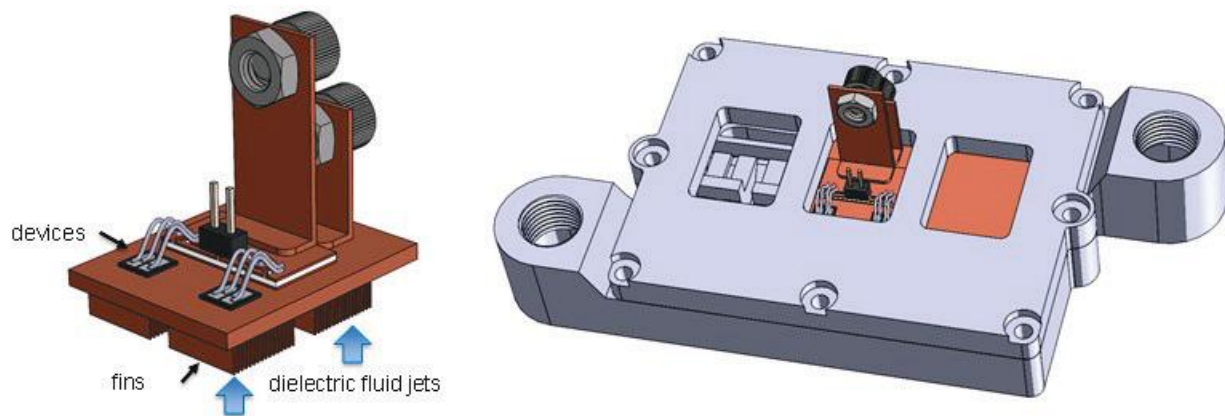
CAD drawings of the SiC module that will be used to measure the junction-to-fluid thermal resistance of the dielectric fluid, single-side cooled concept. The module within the heat exchanger is shown in the image to the right.
